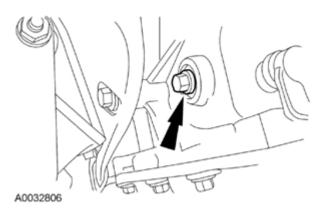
Locating Engine Plug Bolt Courtesy of FORD MOTOR CO.
